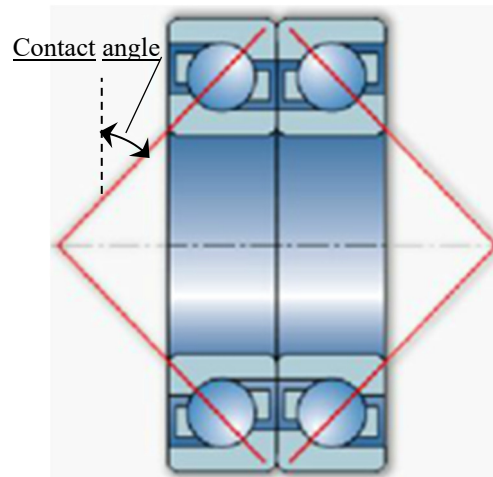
Back-to-Back Arrangement of Angular Contact Ball Bearings (29)
